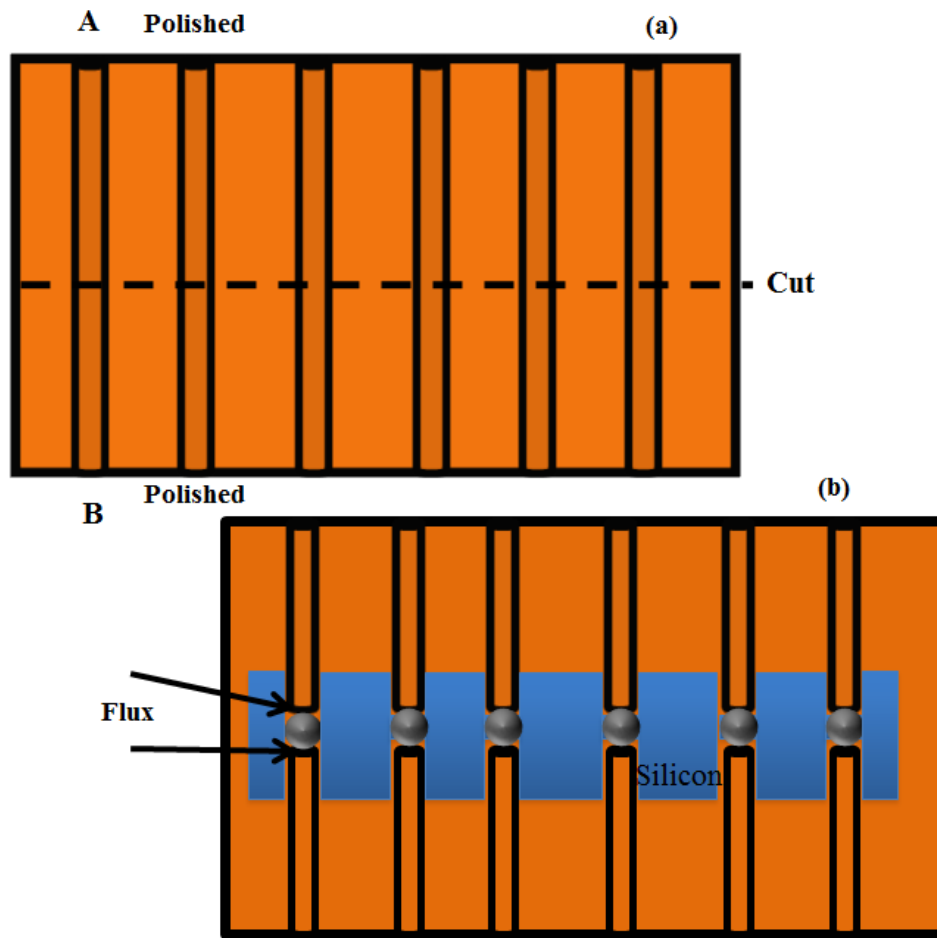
Schematic configurations of tensile samples inside the miniature jig (a) locations of polishing and cutting of copper wires are illustrated, (b) configuration of solder inside the jig and on silicon plates.
